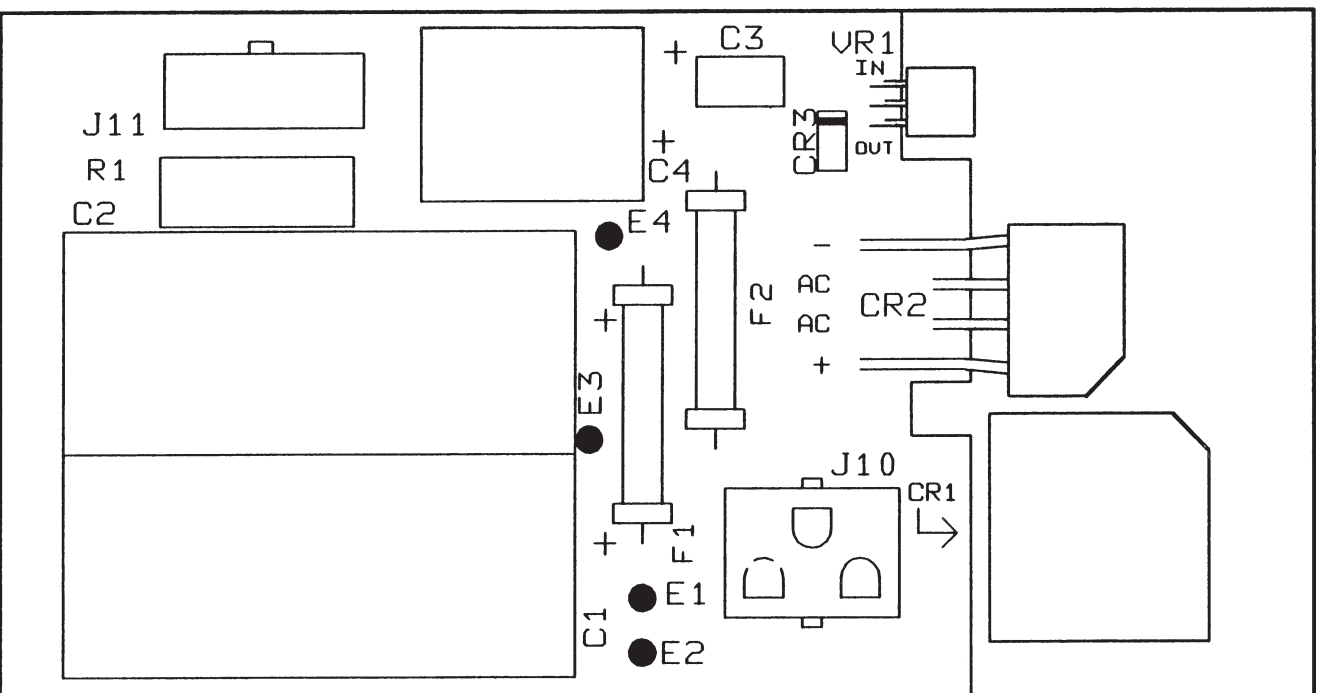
Power Supply Printed Circuit Board Assembly, PN 78049 Revision 1
